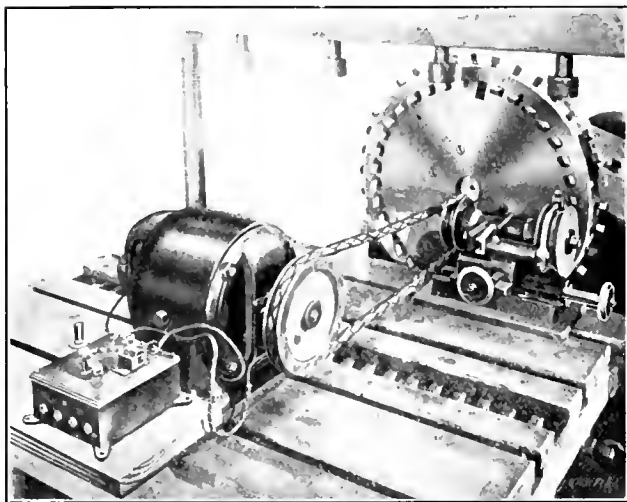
The Riddell Portable Milling Head Grinder as built by the Newton Machine Tool Works.
